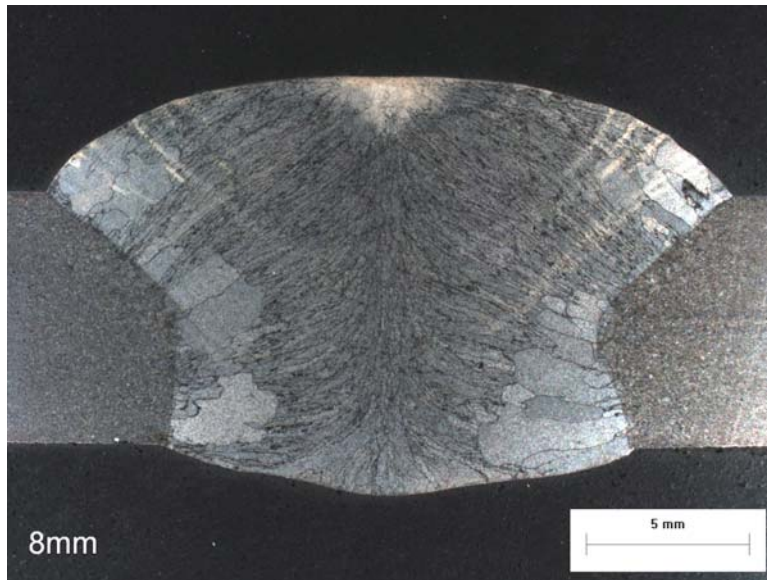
Modified S-SAW Weld 8-mm Plate
